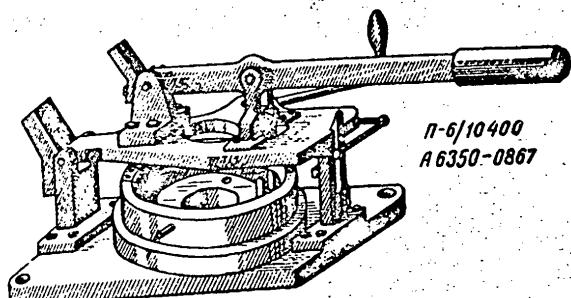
APPLIANCE FOR MOUNTING ACCESSORIES DRIVE SHAFT SPRINGS
